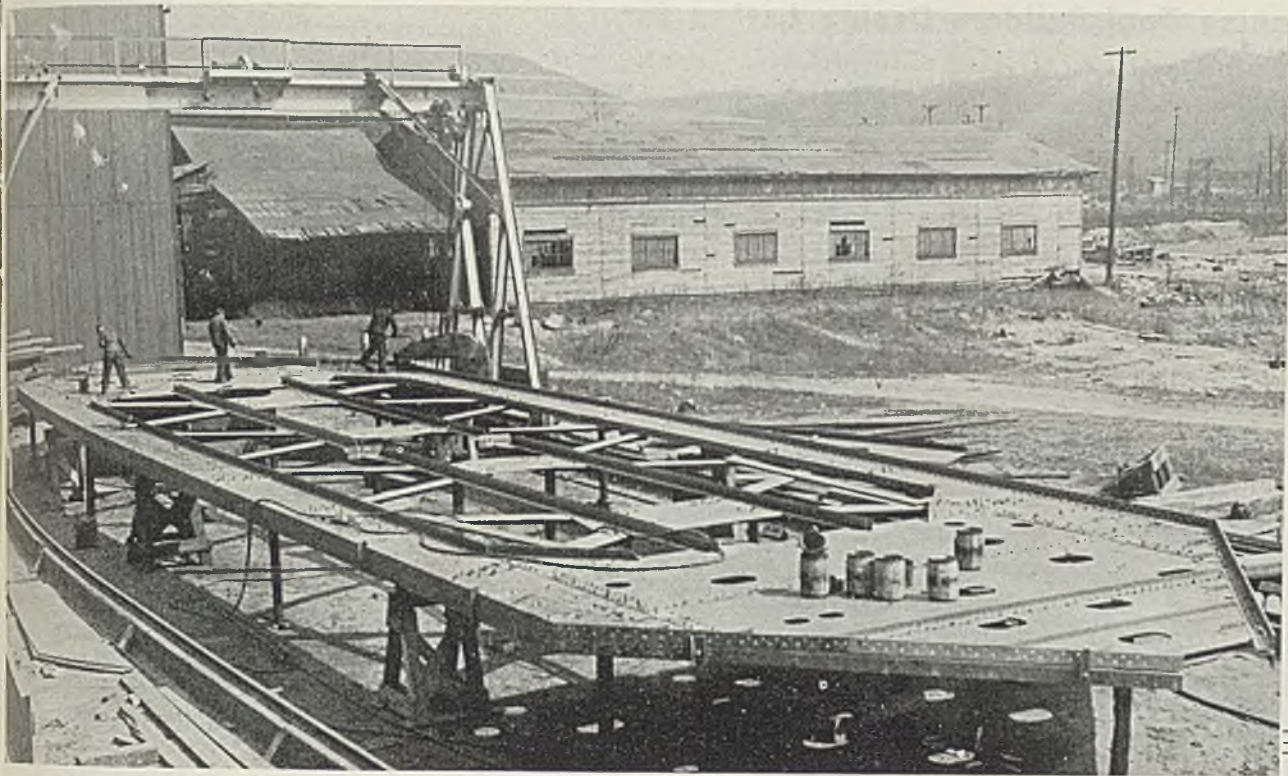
This is a large steel frame in which the rivets are being driven cold using an Osborne compression-type riveter seen working at the far corner of the frame. Its general appearance is that of a large C-clamp. See closeup of this same operation in Fig. 2
